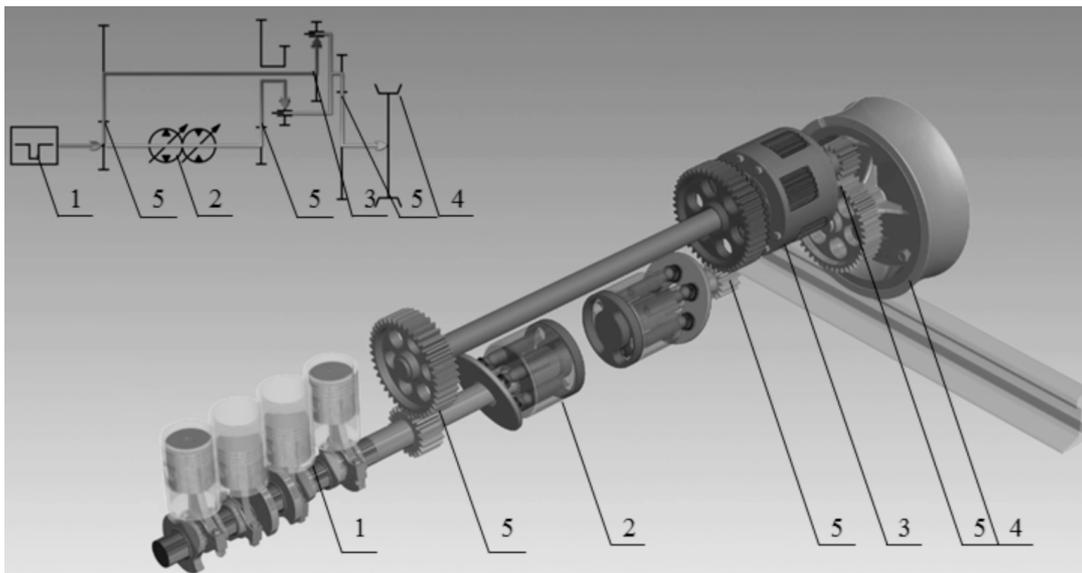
3-D model of HSMT #2: 1 – internal-combustion engine; 2 – hydrostatic drive; 3 – planetary reducing gear; 4 – wheel; 5 – reducing gears
